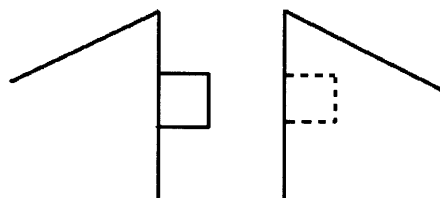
Side view drawing of pin-hole joint as a possibility for snap fit assembly
